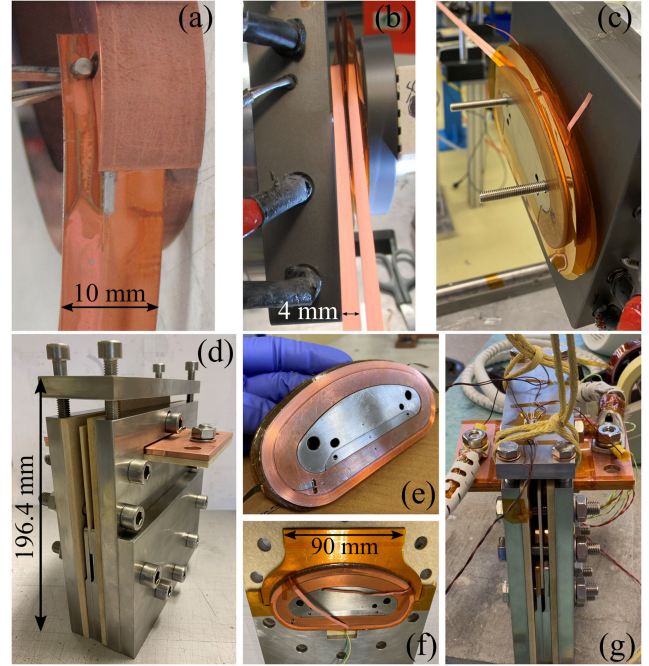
(a) A close-up of the pin to fix start of the winding. (b) VR coil winding process with two 4 mm wide Bruker HTS tapes being wound in parallel. (c) VR coil with emerging Vtaps. (d) Assembled support structure. (e) VR coil before mounting in the support structure. (f) Copper lead placement. (g) VR coil fully mounted, all six Vtaps connected and ready for testing. The resistance over the entire assembly with Cu leads was measured to be  $340 \text{ m}\Omega$  at 293 K.
